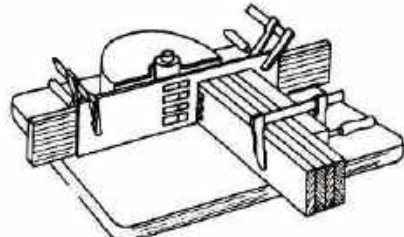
CUTTING FINGER JOINTS ON THE SHAPER
